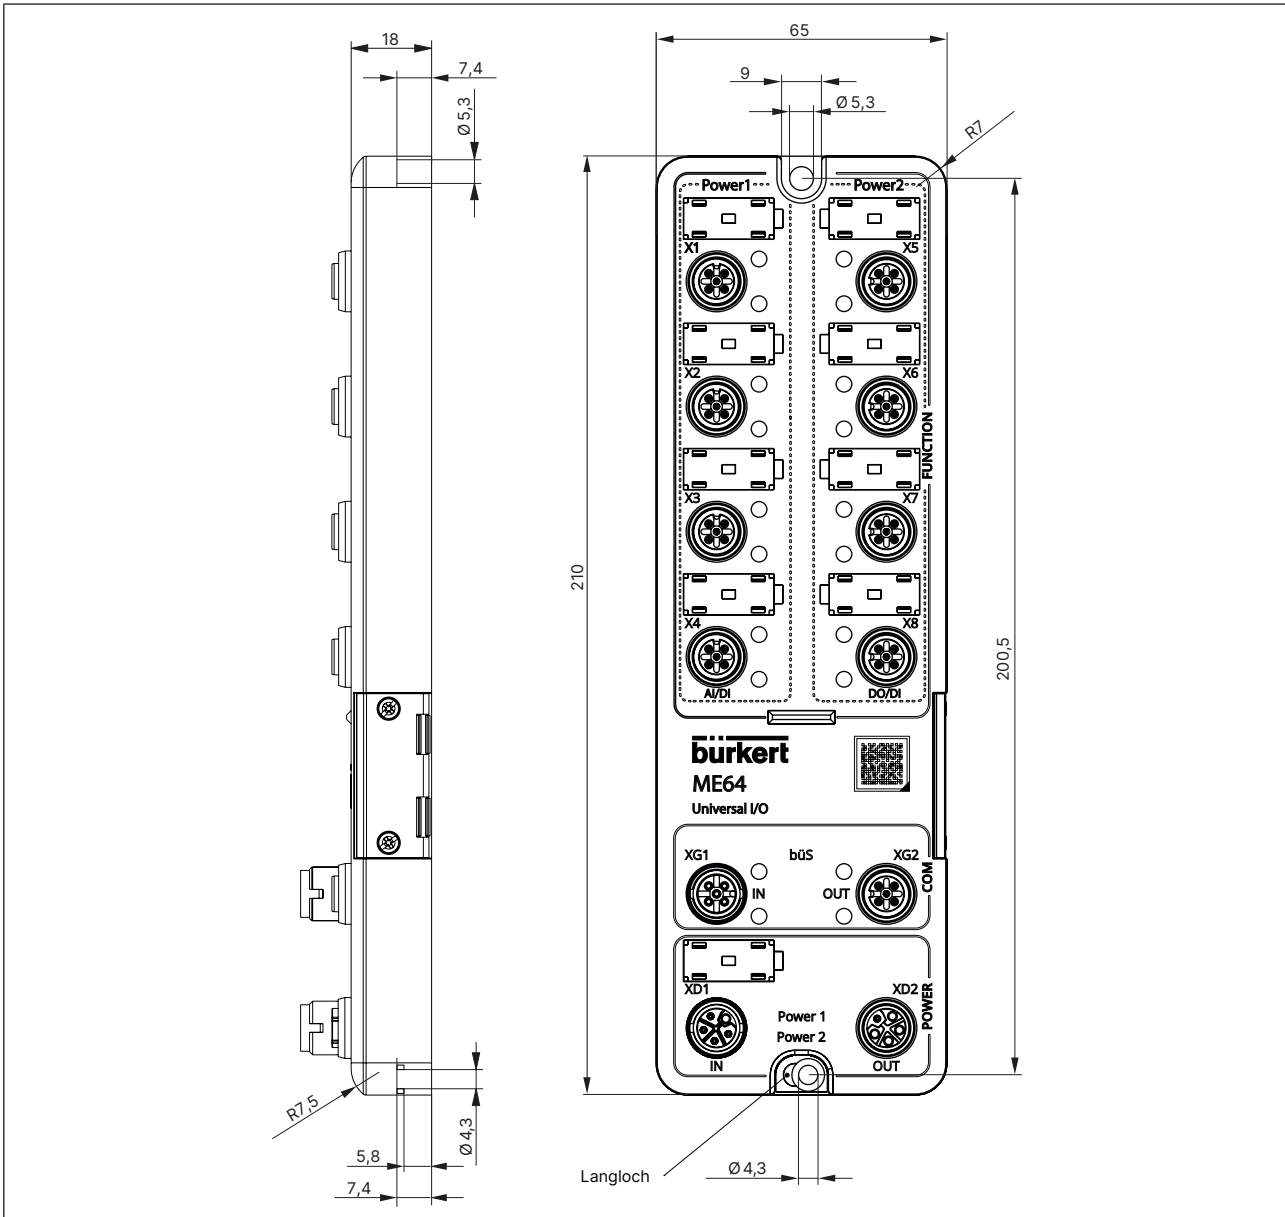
Dimensions of the I/O module, Type ME64 Universal I/O
